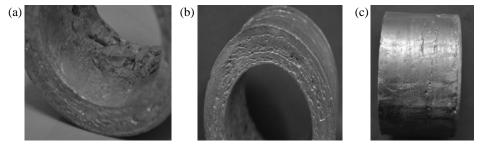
Physical properties of casting with temperature 690 °C. (a) Inner surface; (b) side surface; (c) outer surface
